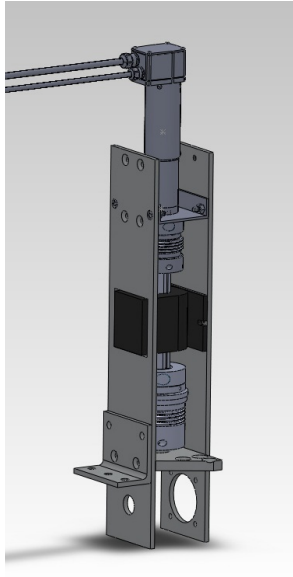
Wheel module with new, higher torque motor and gearbox.
